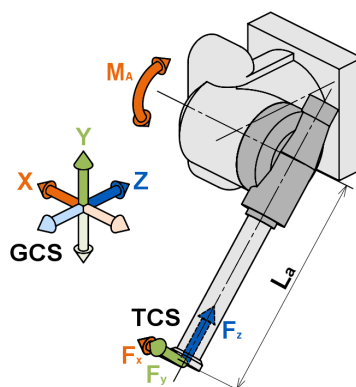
Schema of the milling using A-axis pivot spindle head
